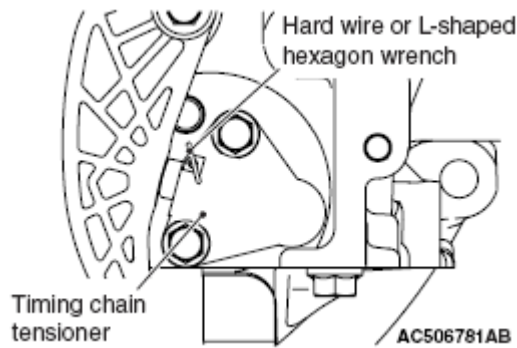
Identifying Timing Chain Tensioner And Hard Wire Or L-Shaped Hexagon Wrench
